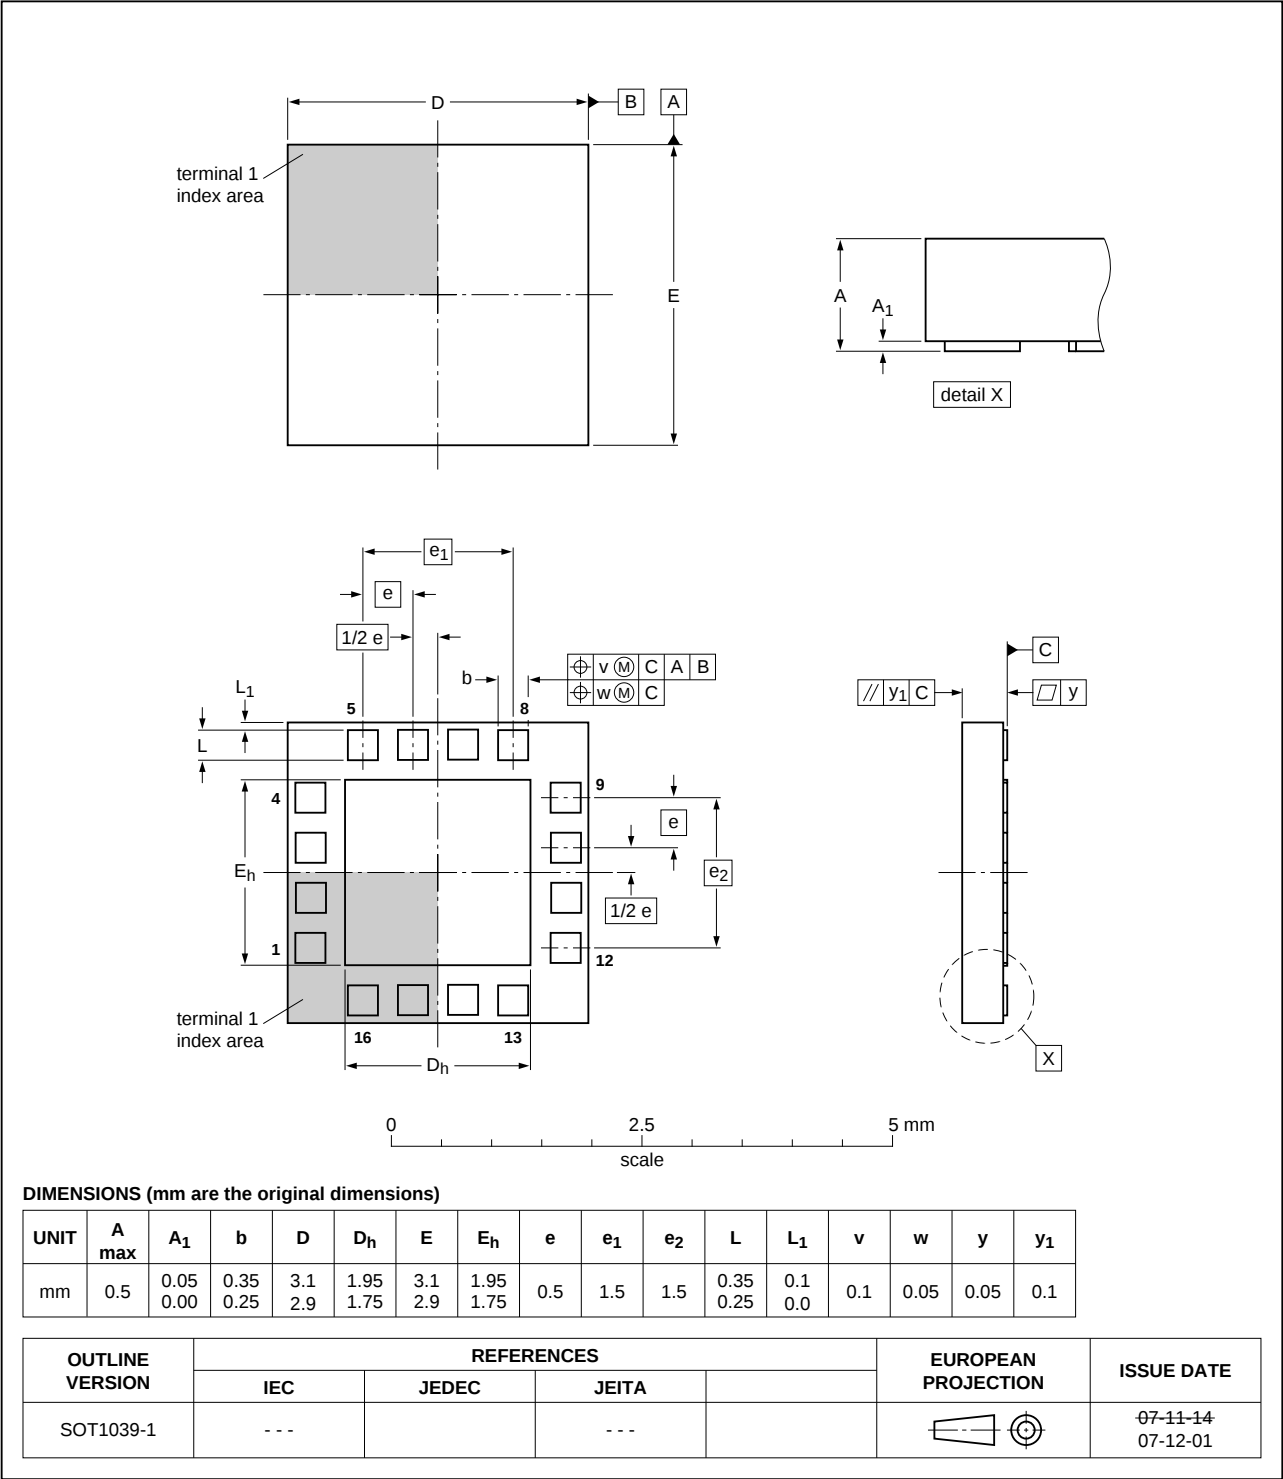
Package outline SOT1039-1 (HXQFN16U)
